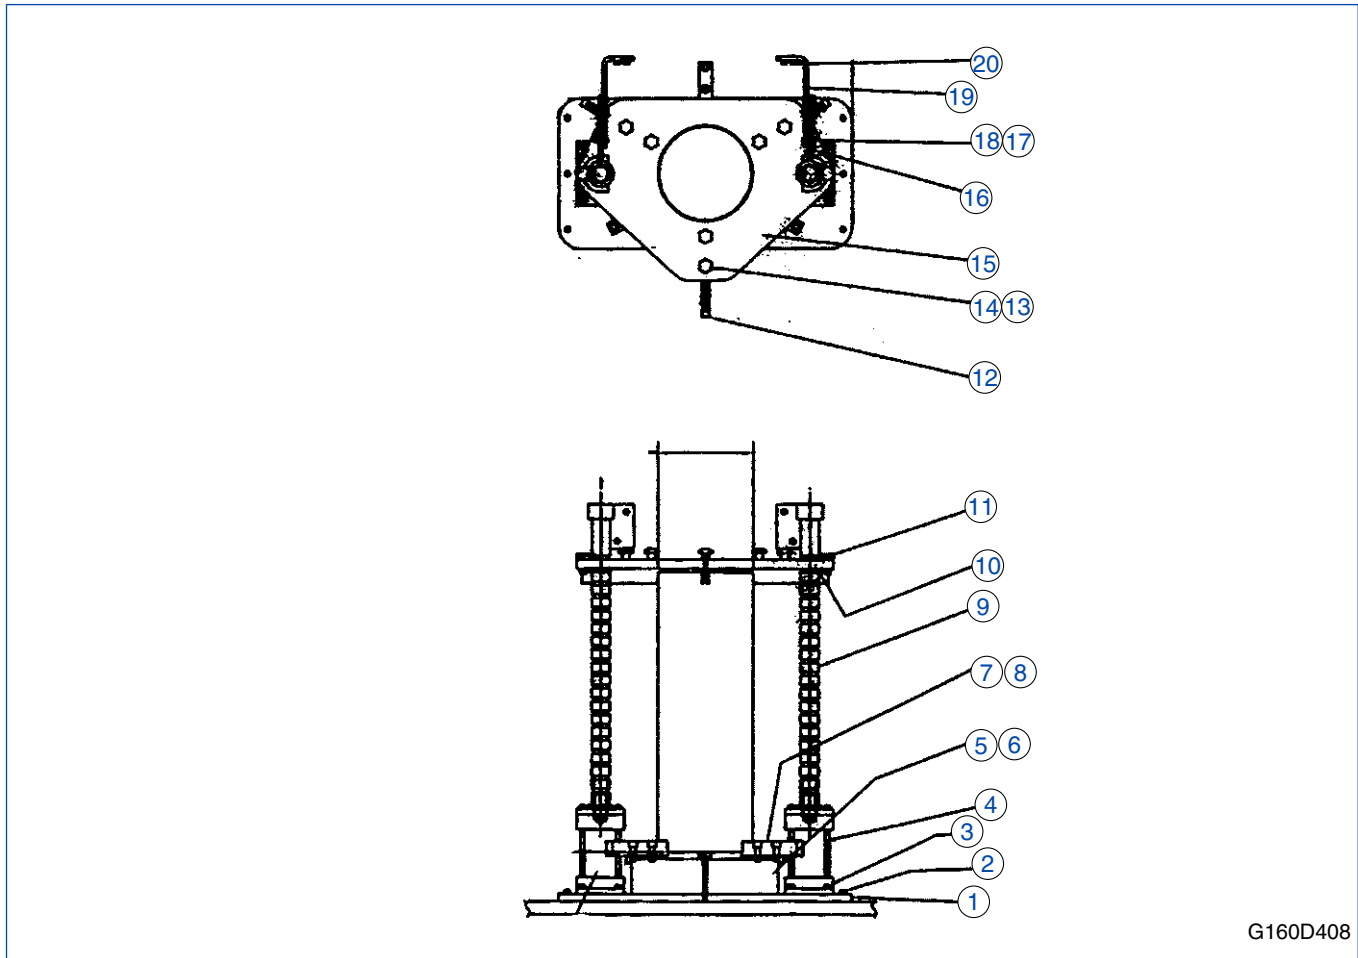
C – END CLAMPING FIXTURE ASSEMBLY
